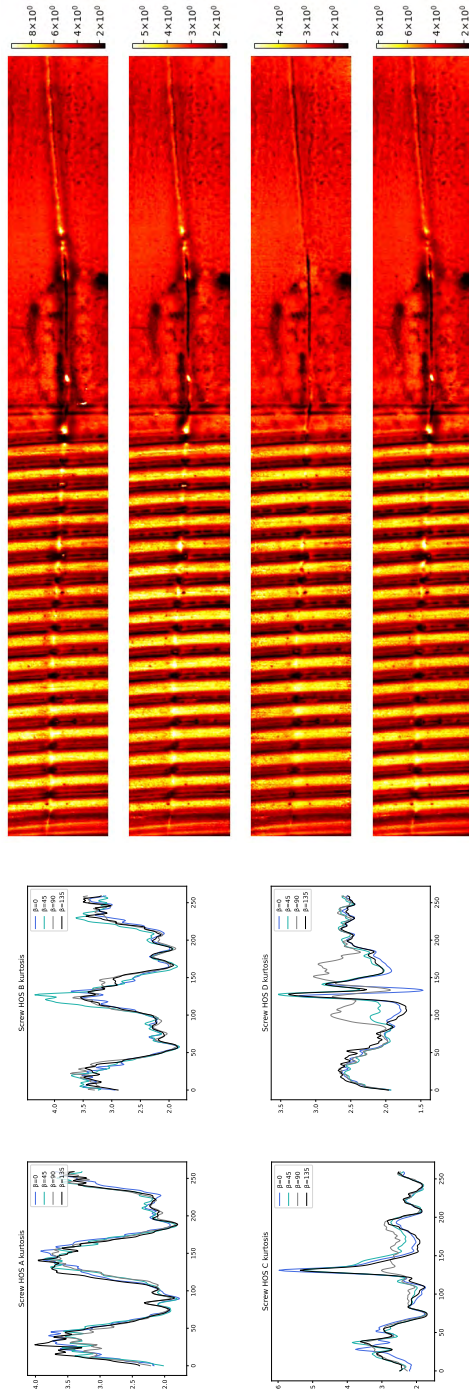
Steel screw Kurtosis, cooling thermogram.
